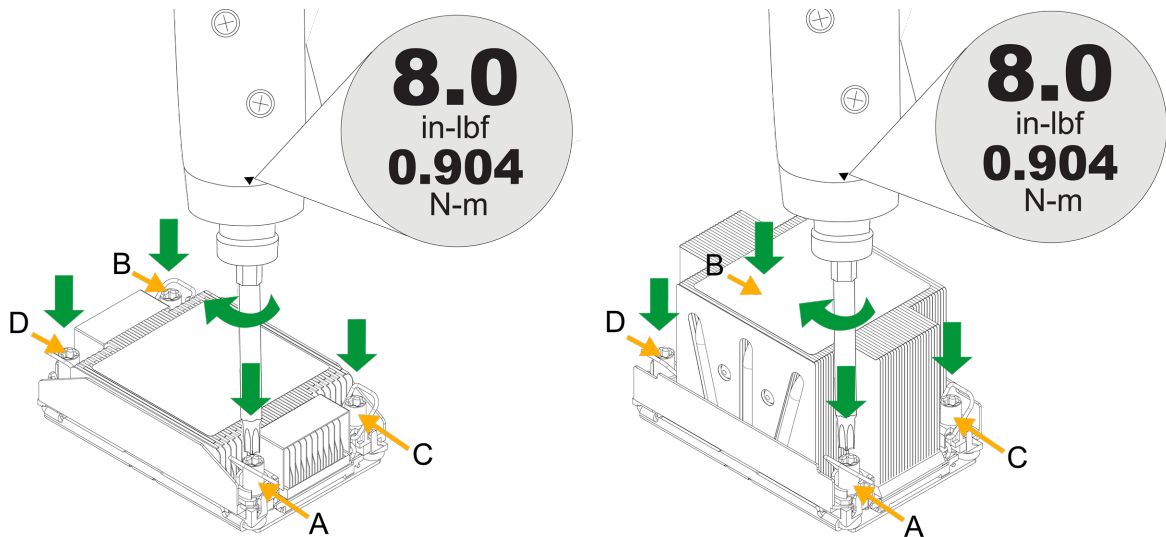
Installing the PHM with a Torque Driver (1U left, 2U right)
